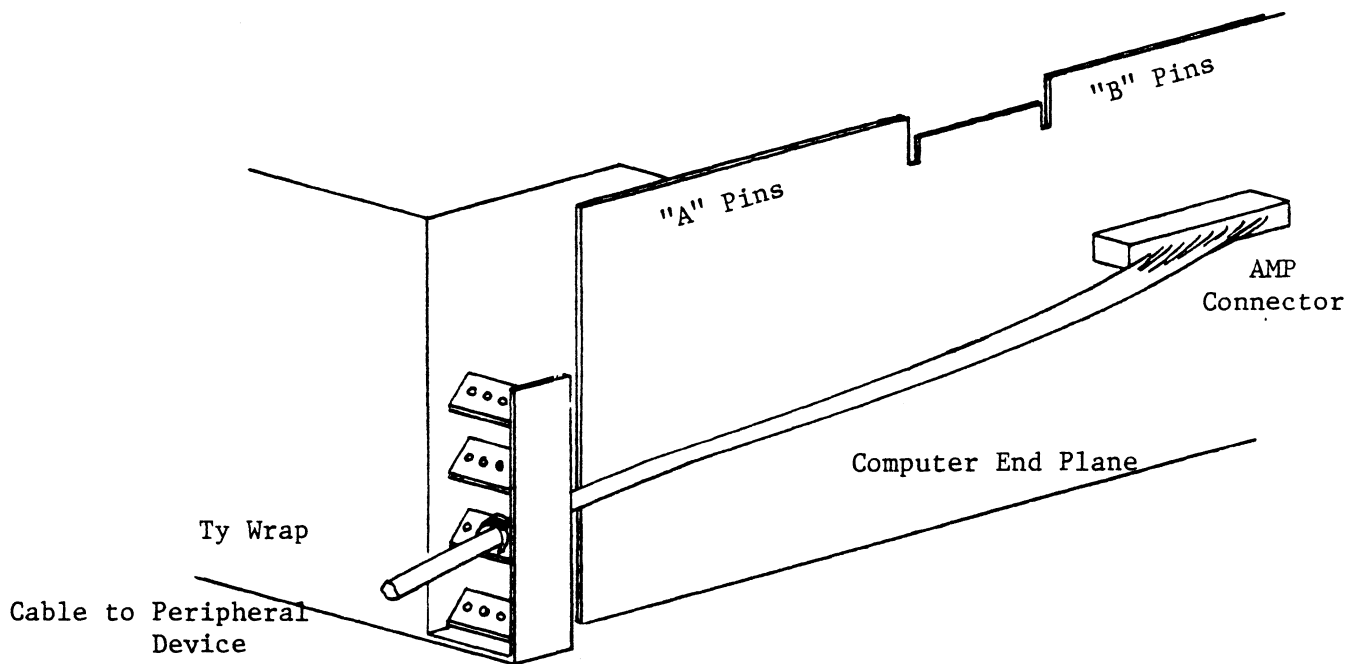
Typical Single Piece Peripheral Cable Assembly
